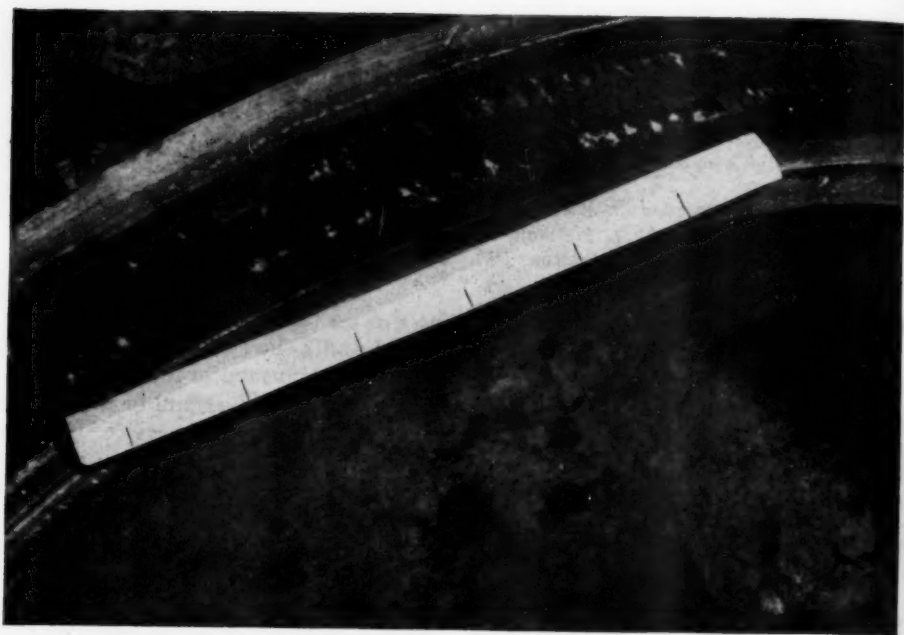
Corroded Cast-Steel Ring and Cylinder-Head Seal
